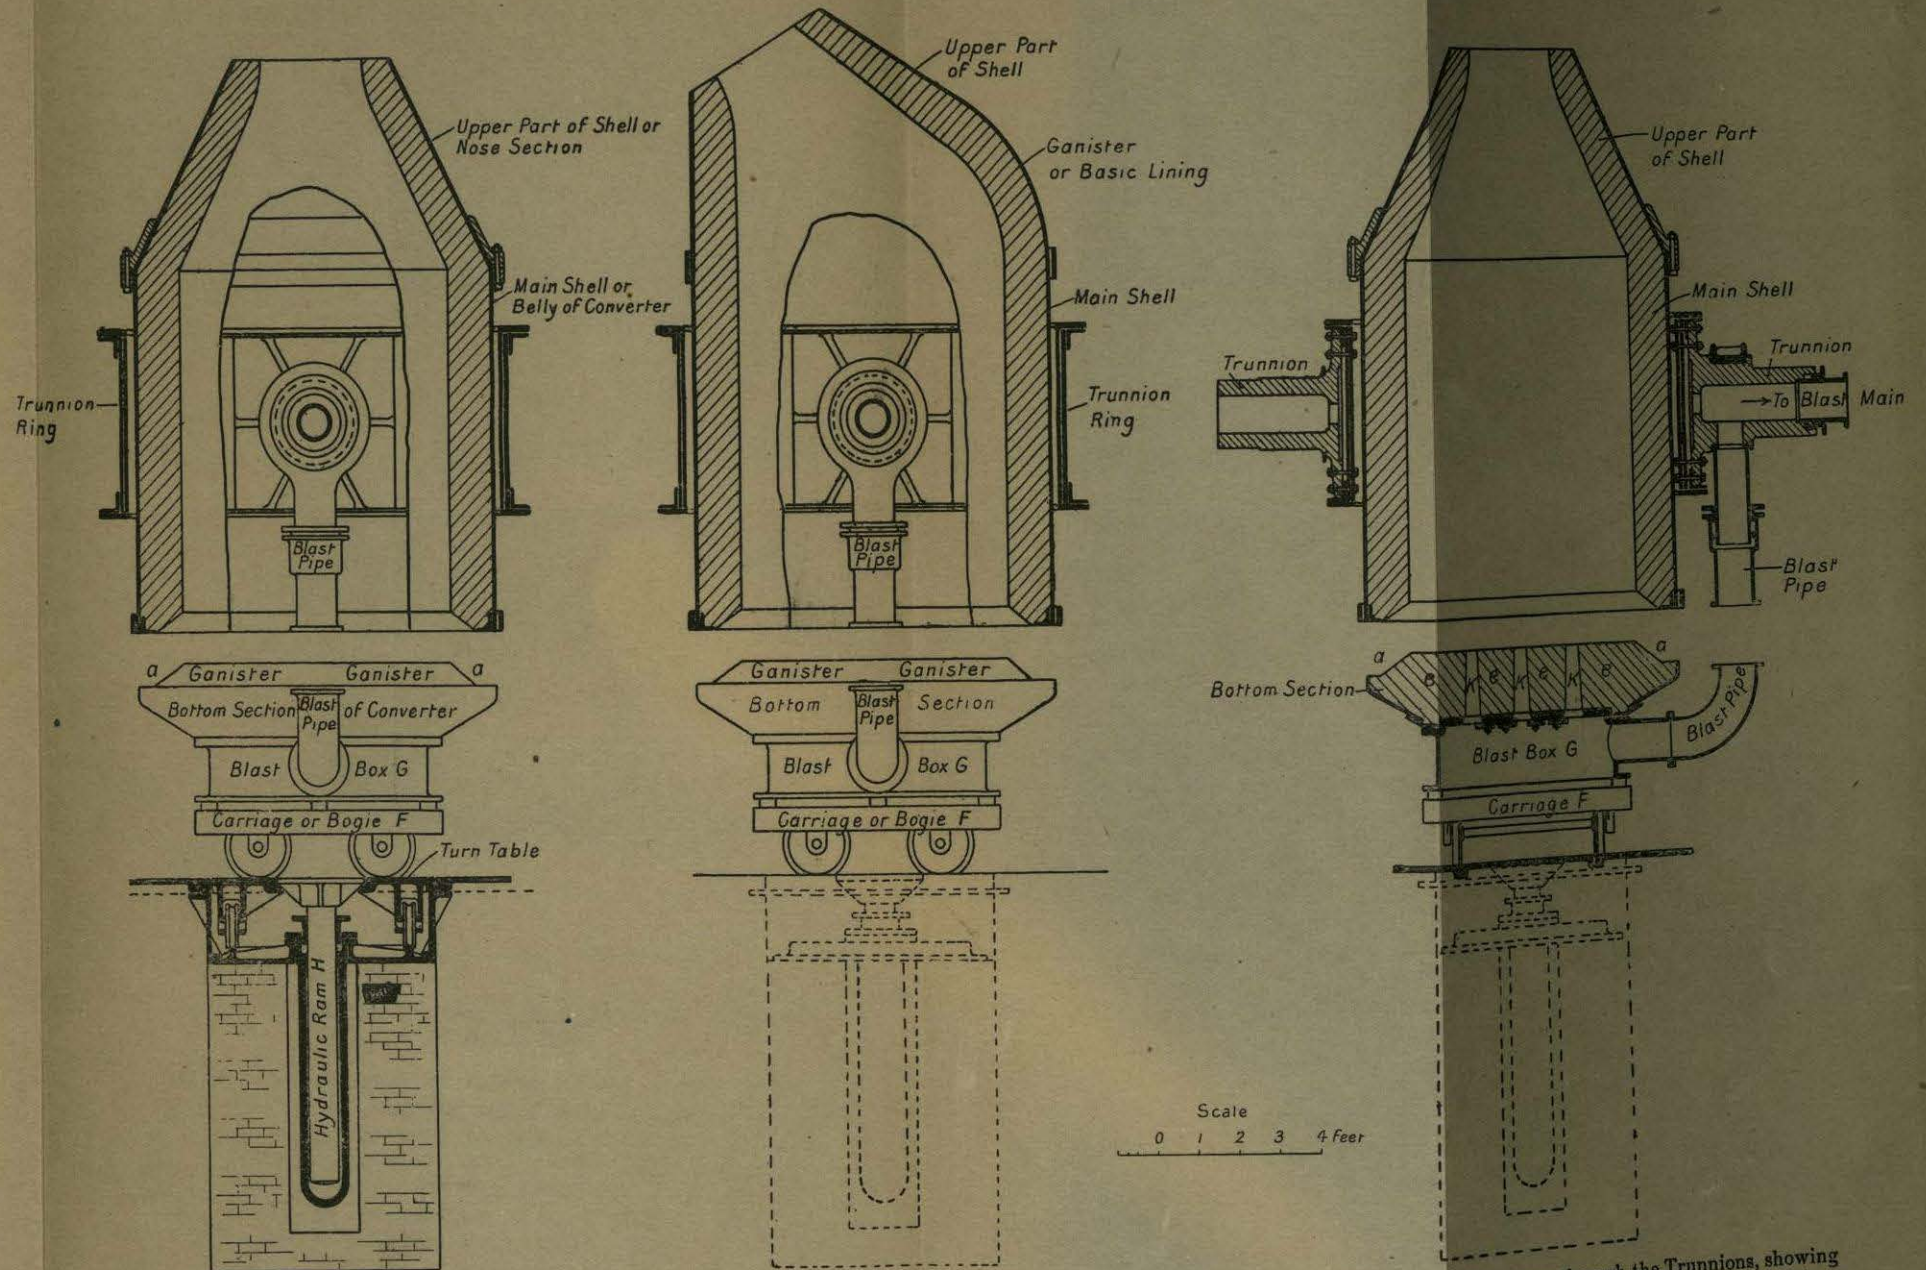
Concentric Converter in part section and end elevation, with bottom section on bogie ready to be lifted by hydraulic ram.
